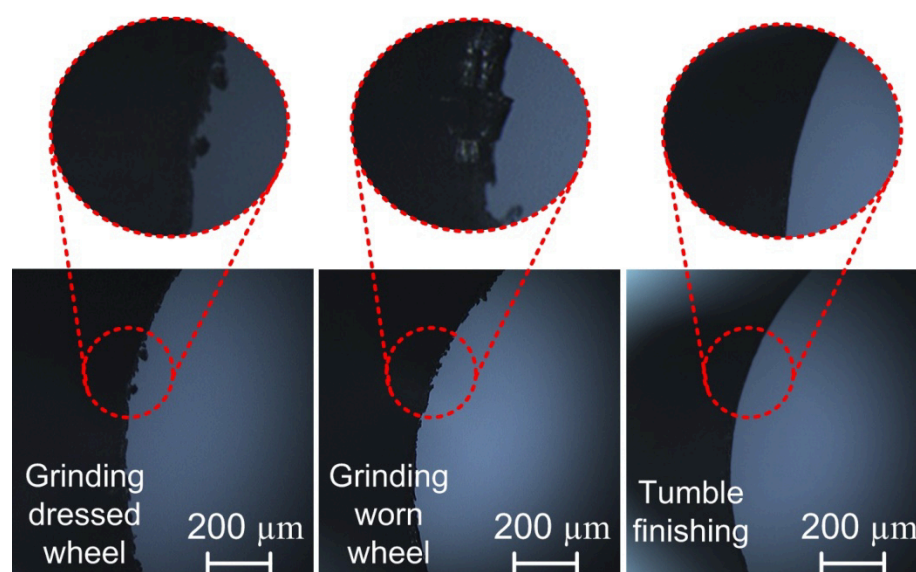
Different characteristics of burrs due to grinding dressed wheel and grinding worn wheel and typical edge after burrs removal
